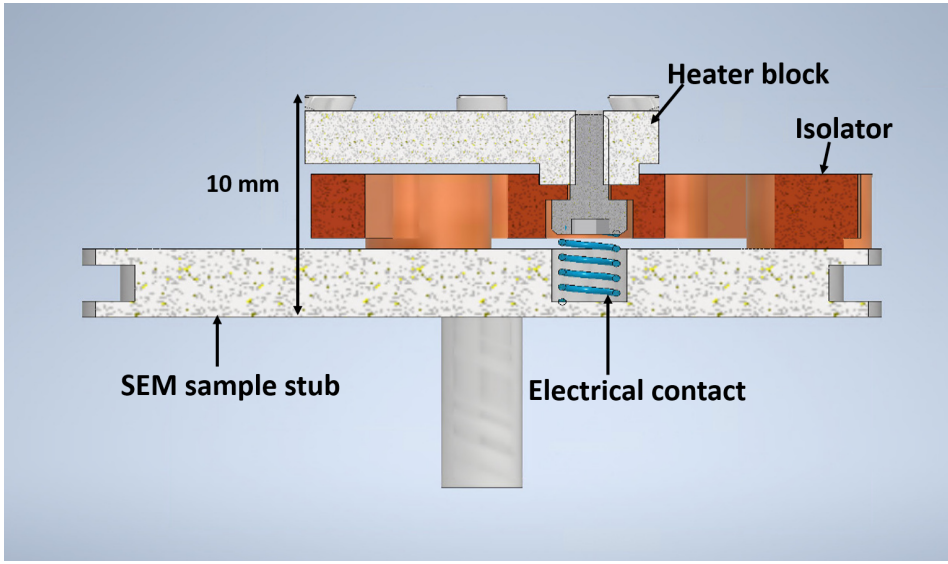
Cross-sectional CAD drawing of the in-situ substrate heater, showing the electrical contact (using a spring) between the SEM stub and the heater block.
